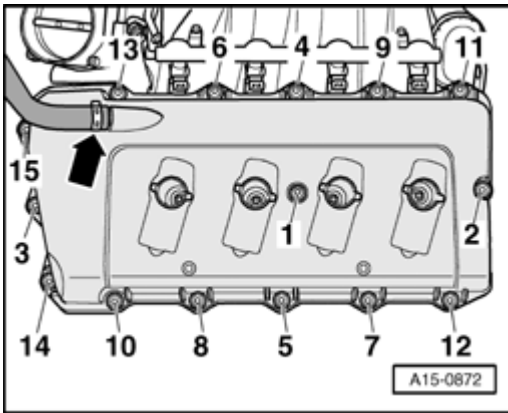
Disconnecting Hose Of Crankshaft Housing Ventilation & Removing Right Cylinder Head Cover Screws In Sequence
